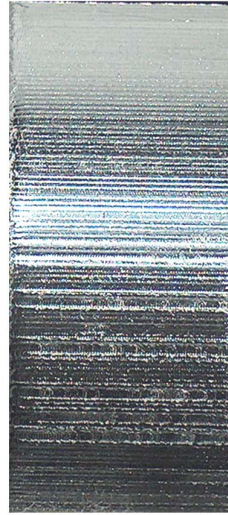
The Photographs of the surfaces that are machined by using 3-axes CNC milling
